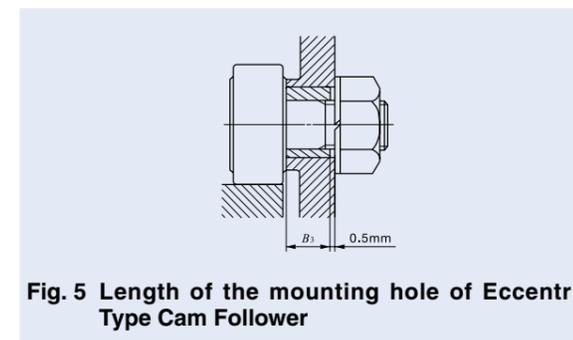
Length of the mounting hole of Eccentric Type Cam Follower
